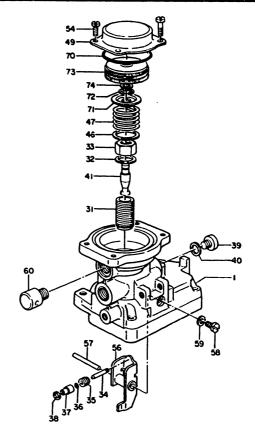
Aneroid compensator - exploded view ANEROID COMPENSATOR
